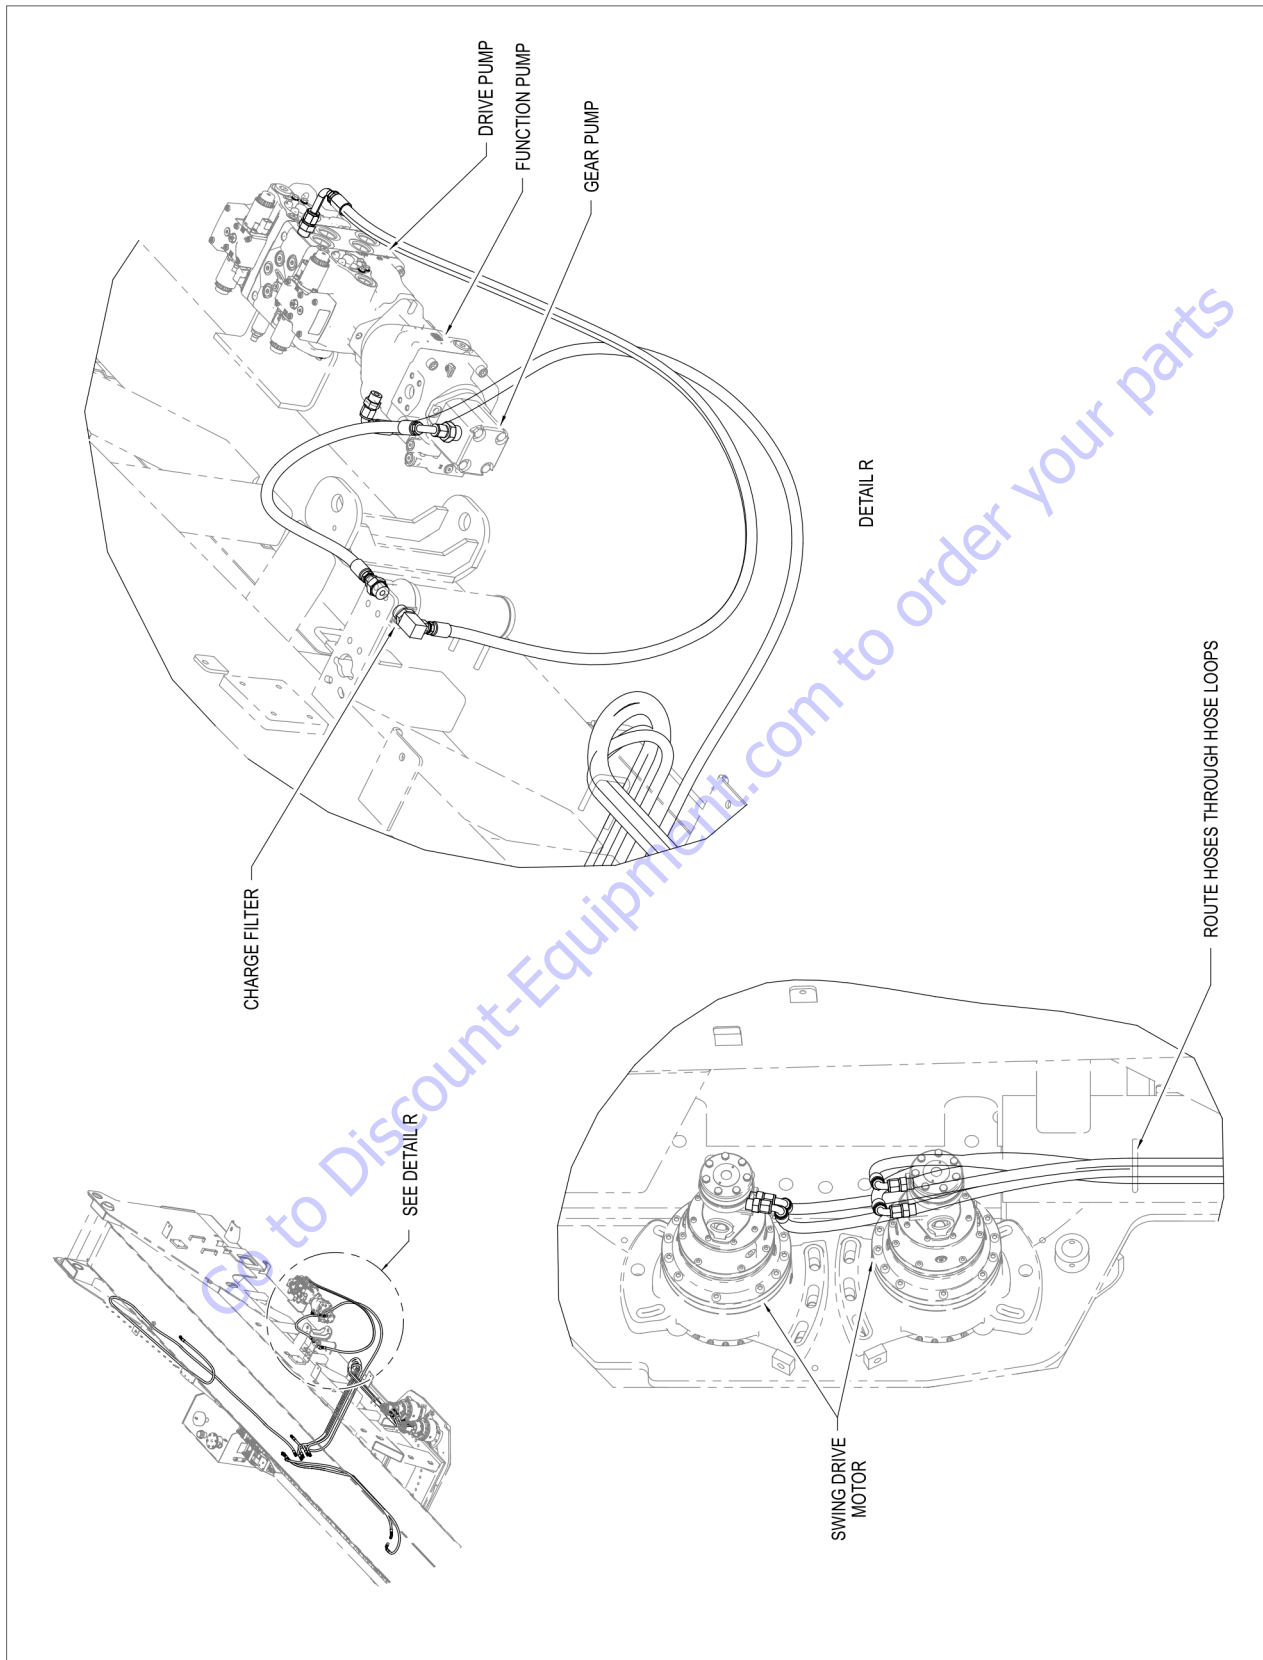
Hydraulic Hose Installation - Sheet 6 of 8
